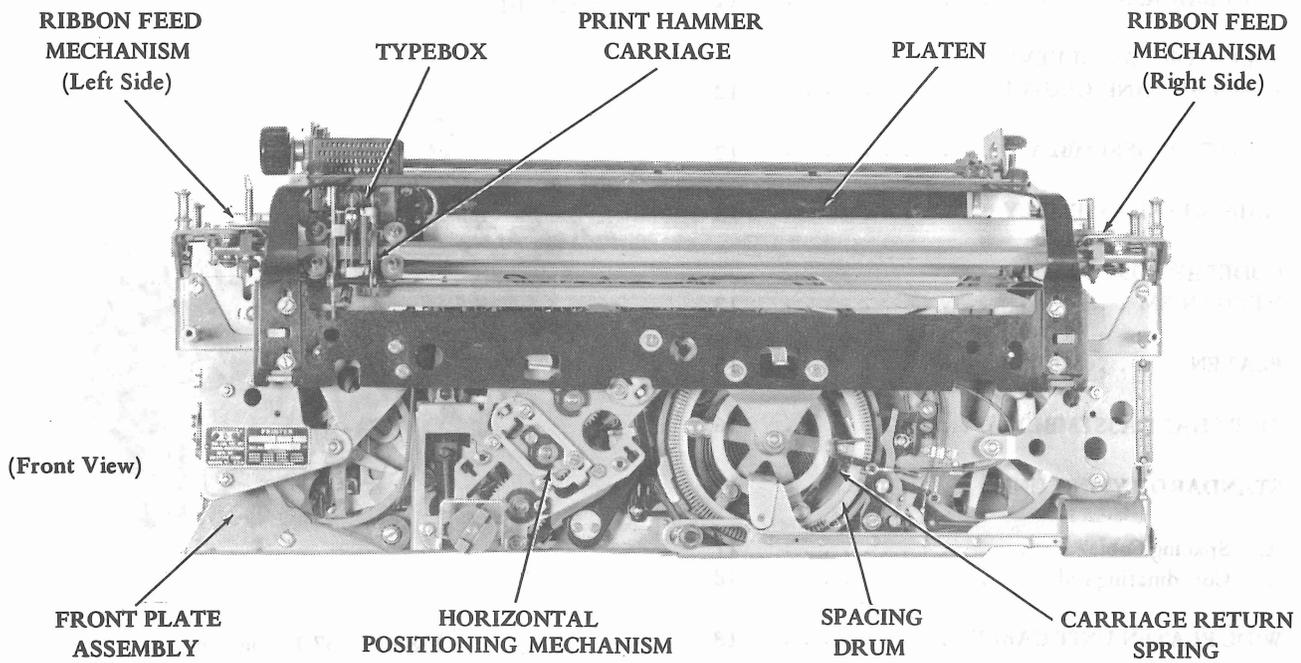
37 Wide Platen Typing Unit (Sprocket Feed)
